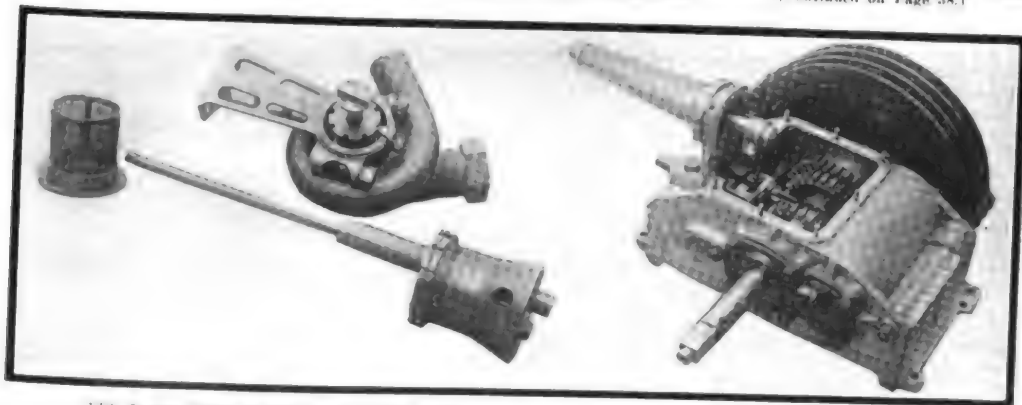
OIL PUMP FILTER AND WATER PUMP
